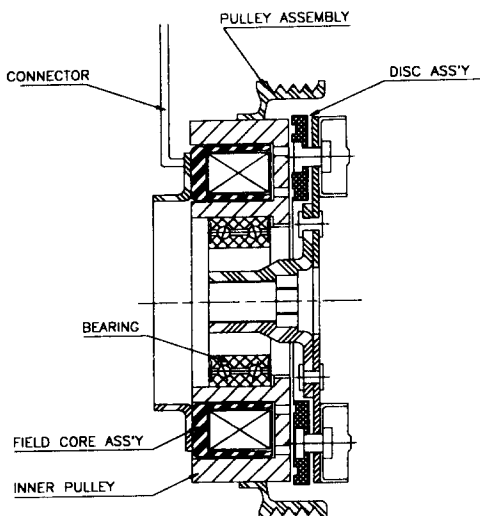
Schematic diagram of clutch assembly for car air conditioner
